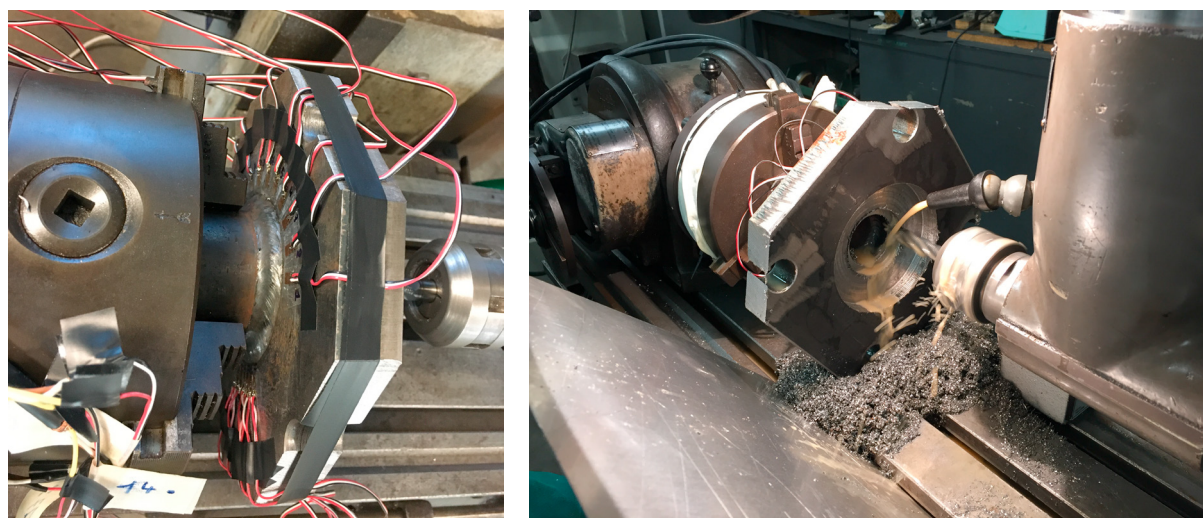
Experimental machining of the specimen's plate, front (left) and back (right) views
